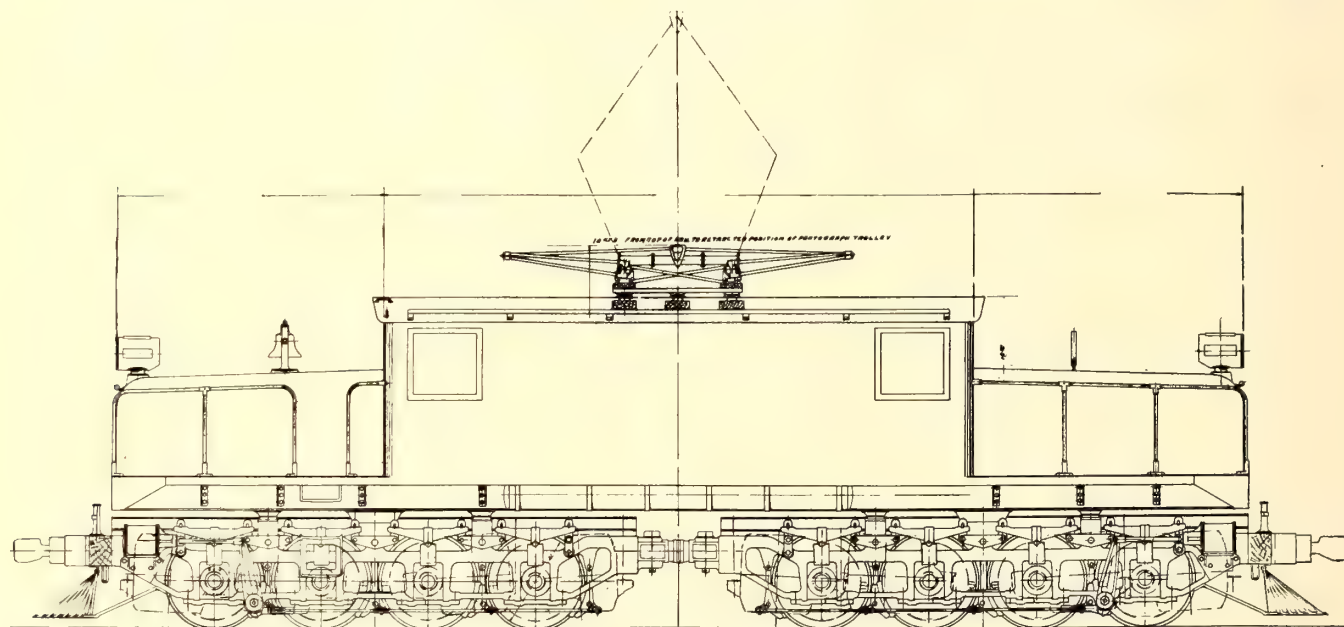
160-TON LOCOMOTIVE WITH MOTOR-GENERATOR SET CARRIED IN THE CAB
